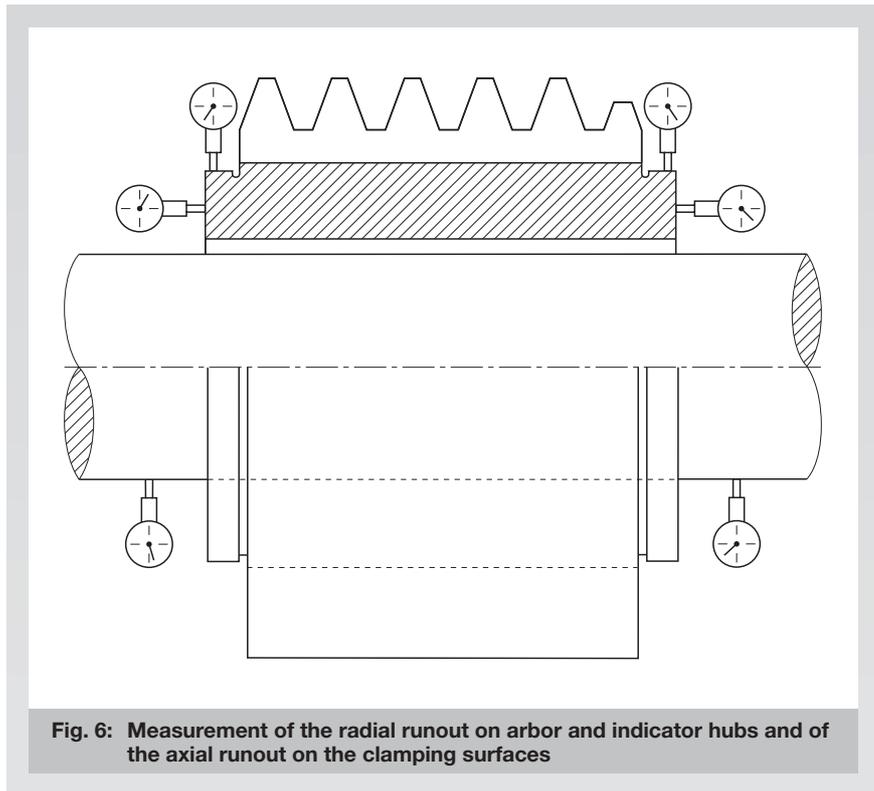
Measurement of the radial runout on arbor and indicator hubs and of the axial runout on the clamping surfaces
